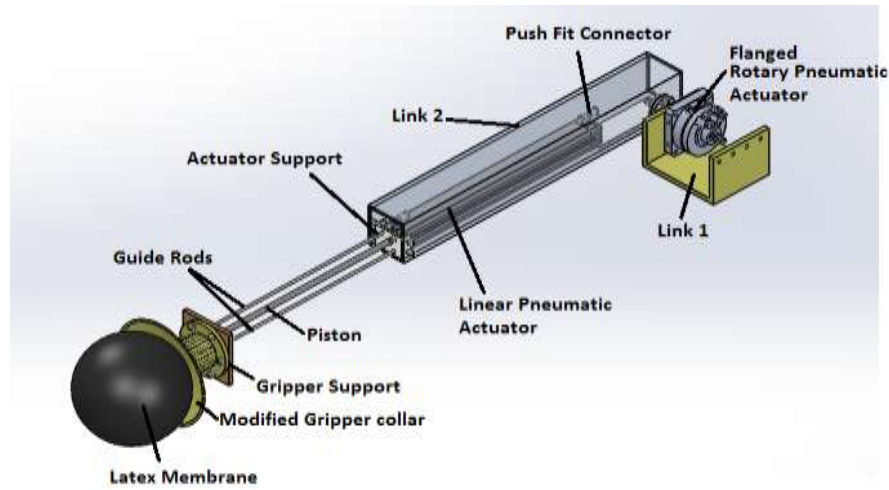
CAD model of Manipulator Design in a Forward Extend Position
